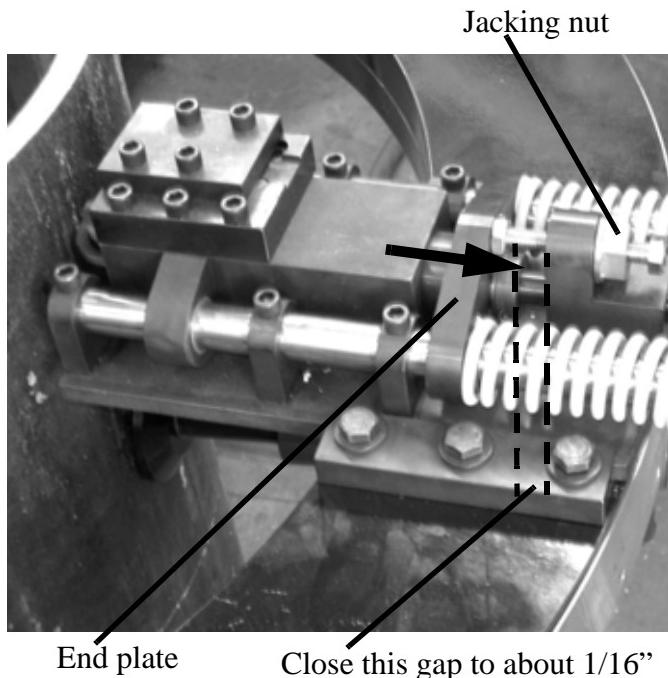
Turn the jacking nut back until the end plate is almost fully retracted. There should be about 1/16" clearance between the endplate collar and the jacking nut post.
